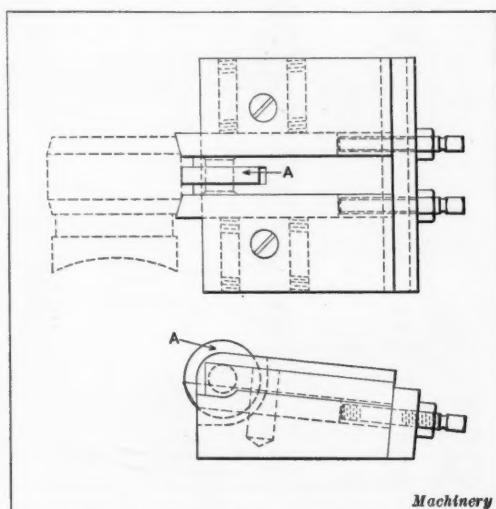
Tools and Holder used for beveling Shell Body below Copper Band
